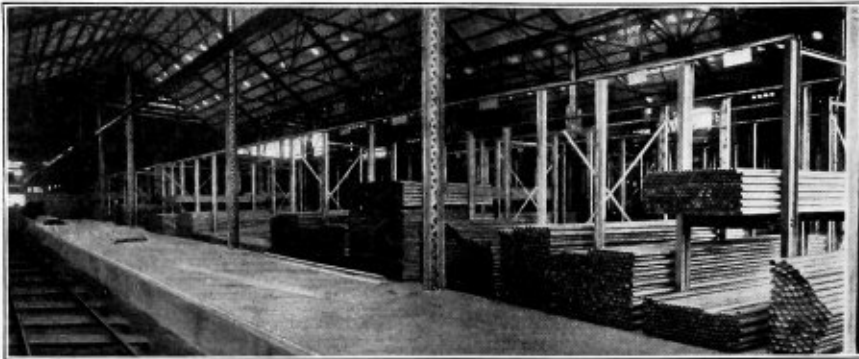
BOILER TUBES ARE STORED IN SPECIAL STEEL RACKS.
